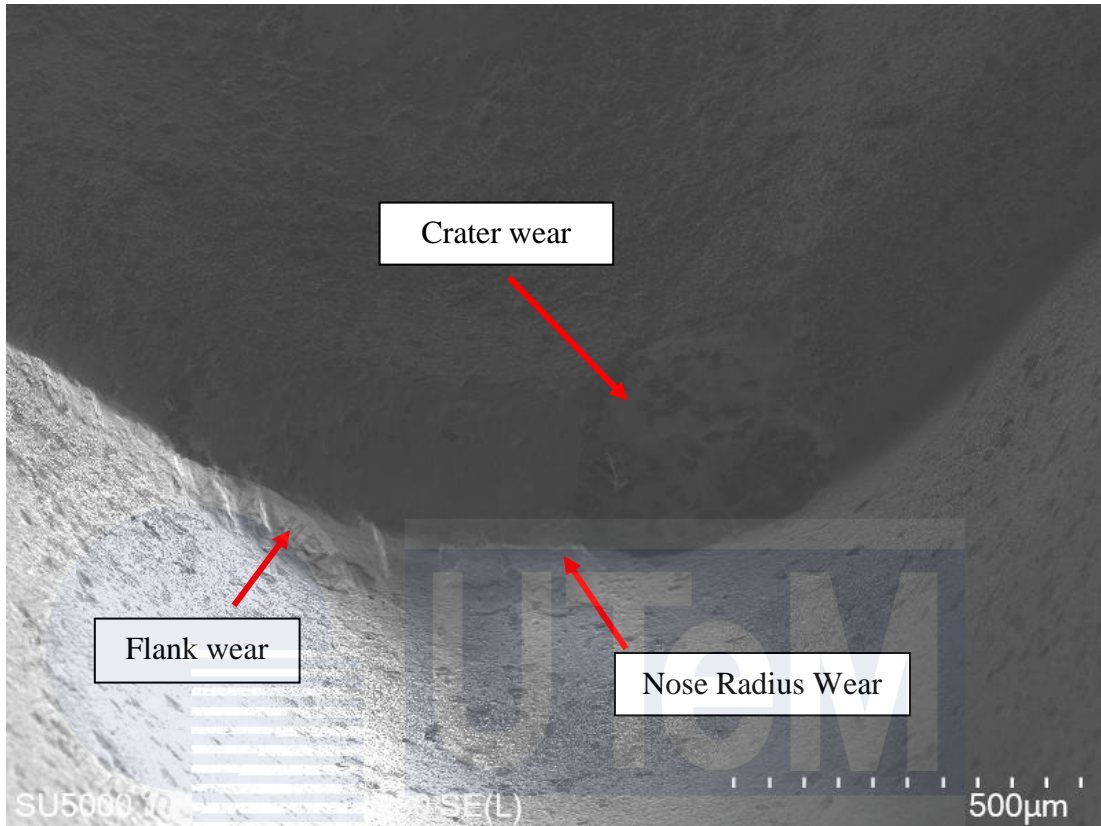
Flank wear, crater wear and notch wear that formed at 80° trigon uncoated carbide
